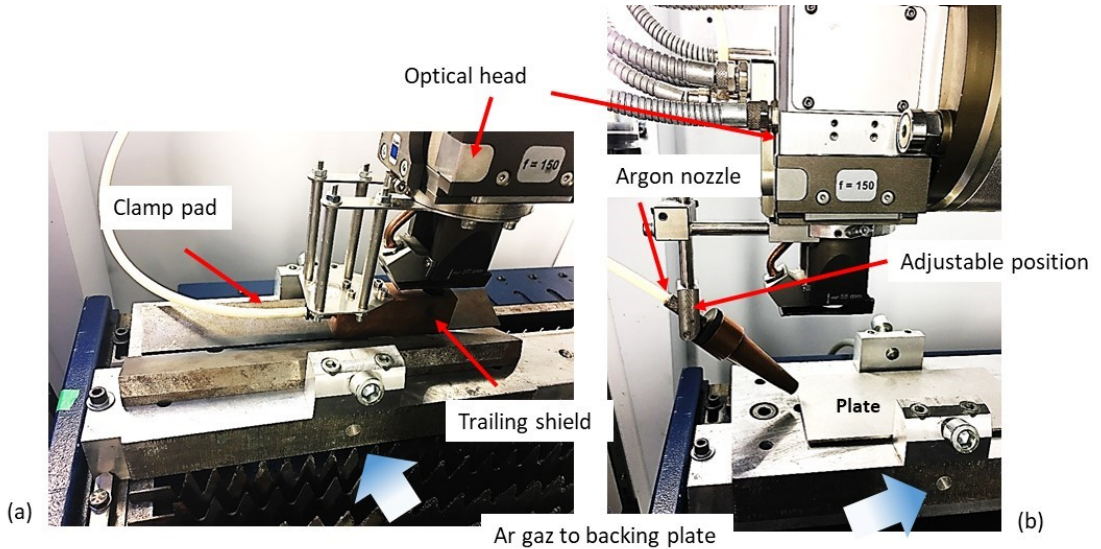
Experimental set-up (a) welding configuration, (b) Local Heat Treatment configuration
